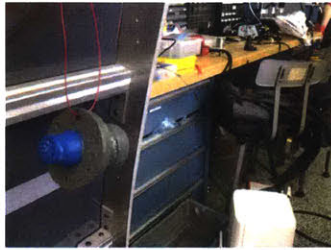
Sealing the Gripper “Head:” epoxy coat curing
